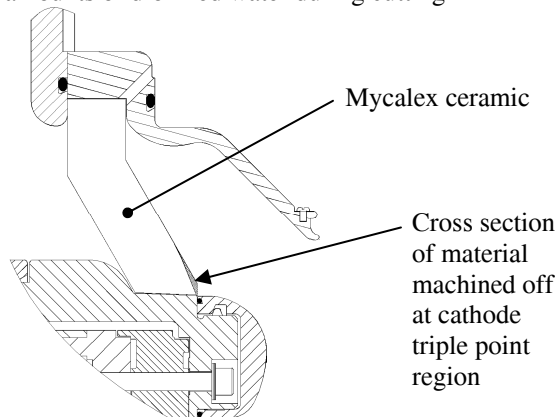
Oil-vacuum insulator assembly modification to Flatface-2 geometry
